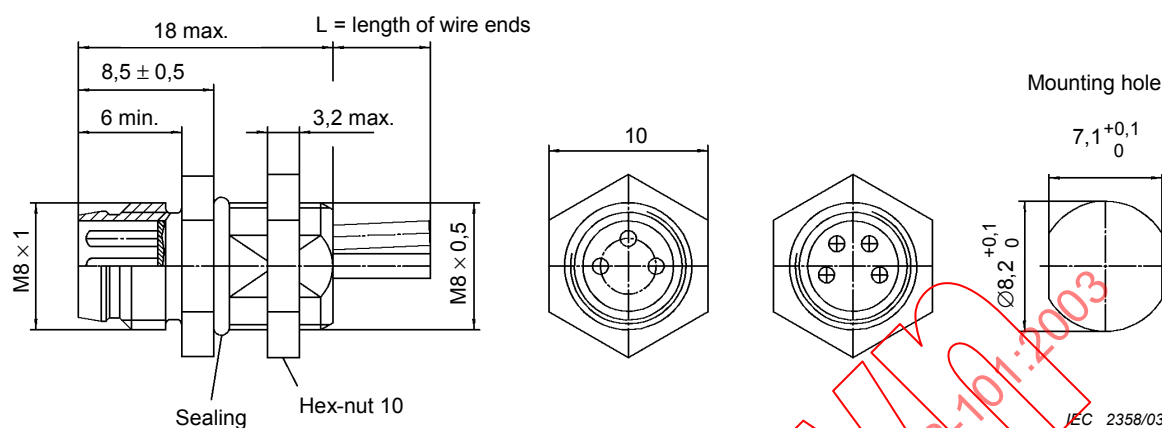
Fixed connector with wire ends, single hole rear mounting, male contacts
